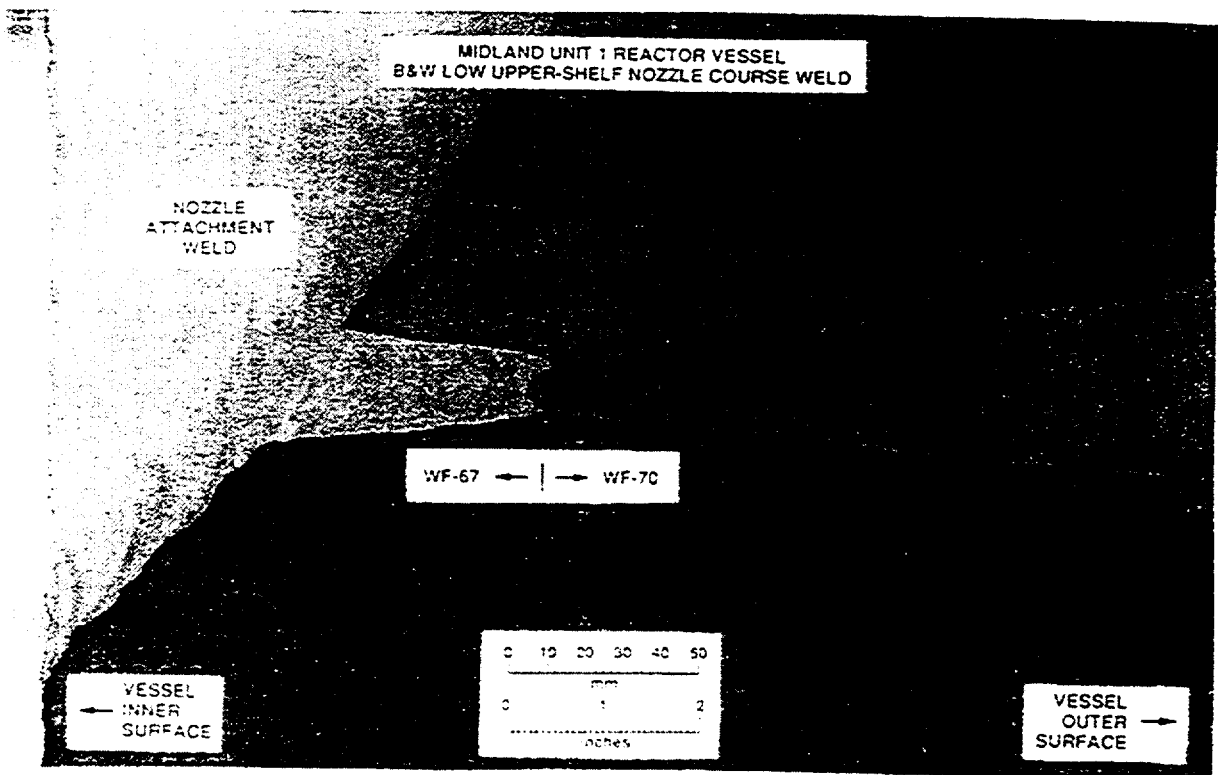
Nozzle course double-V weld showing WF-67 and WF-70 weld halves.
